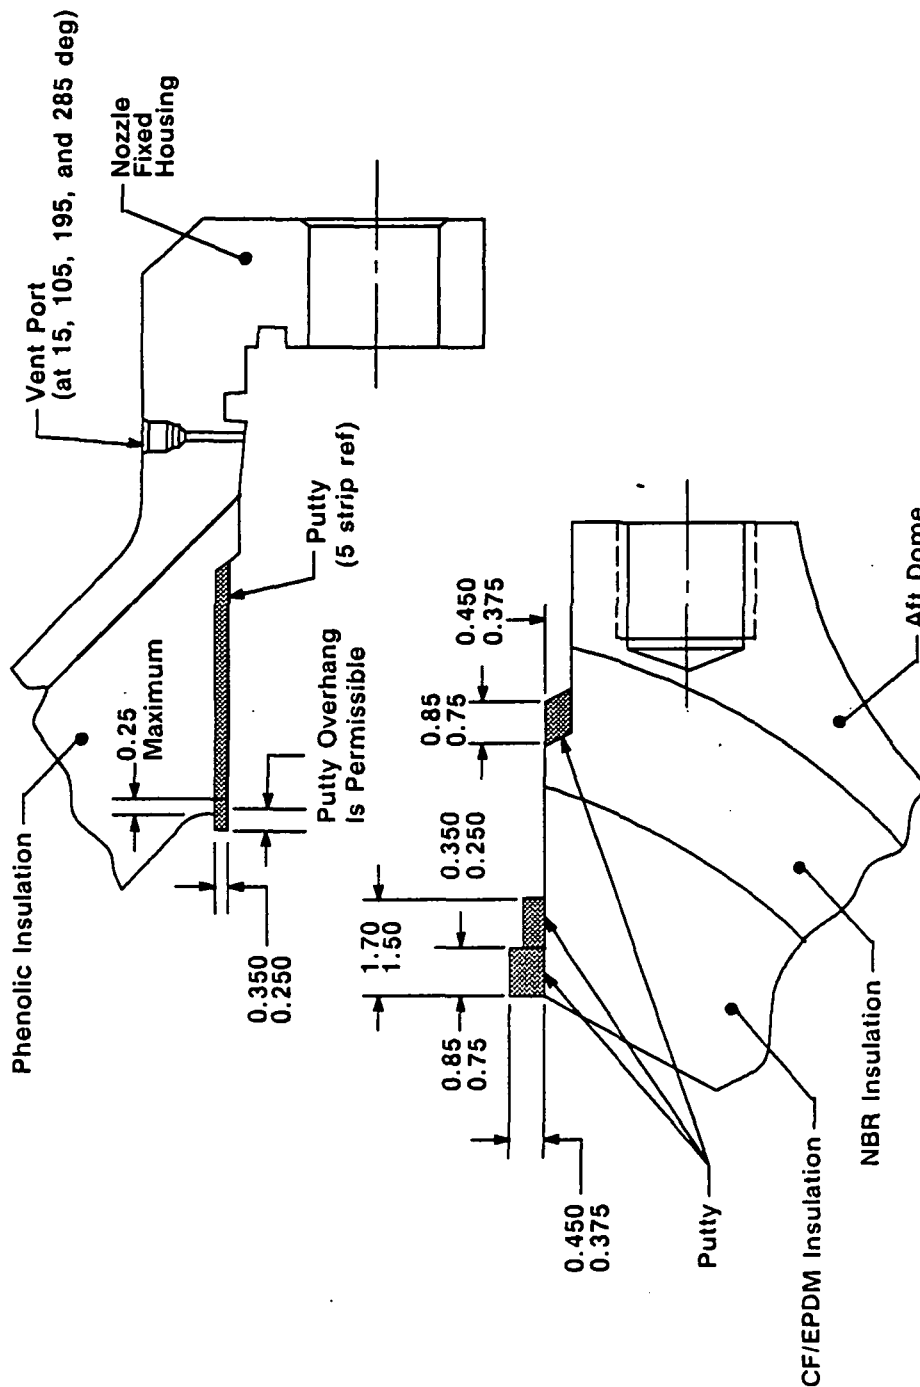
TEM-7 (HPM modified) Nozzle-to-Case Joint Configuration—Putty Layout
